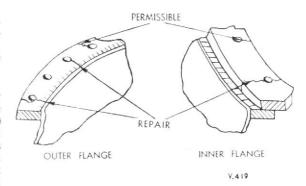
Discharge nozzle inner and outer flanges, showing examples of cracks which are permissible without repair and cracks which must be repaired.
